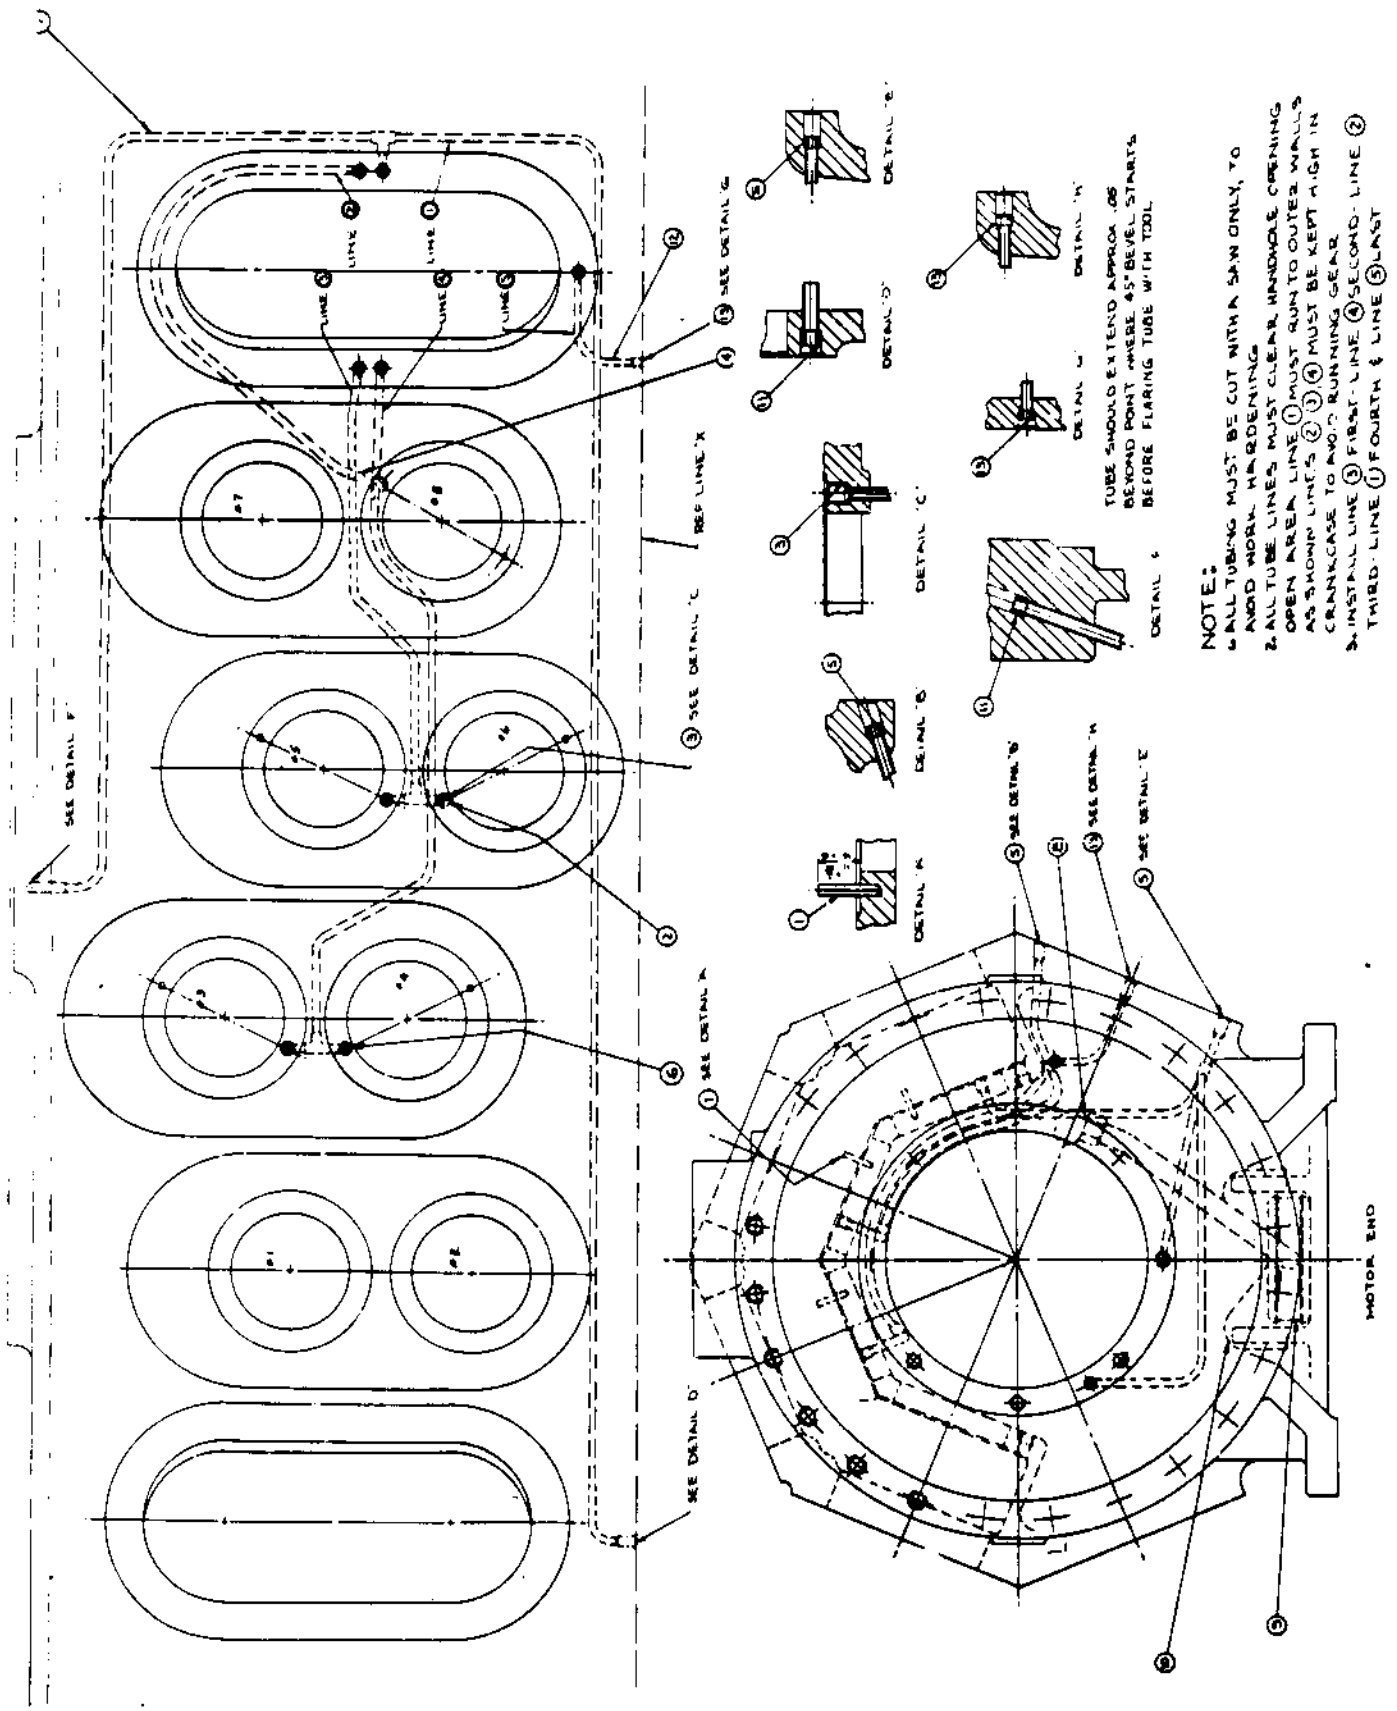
Model E Hermetic Compressor - 8 Cylinder
